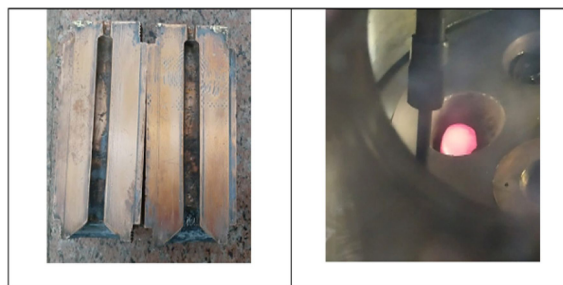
The copper mold used for preparing the rod-shaped samples and the molten charge inside the vacuum chamber of the arc furnace.
